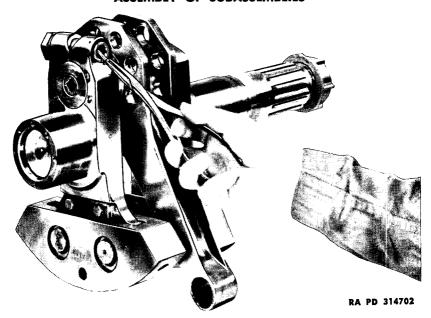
Installing Cotter <u>Pin for</u> Clamping Cap Screw
